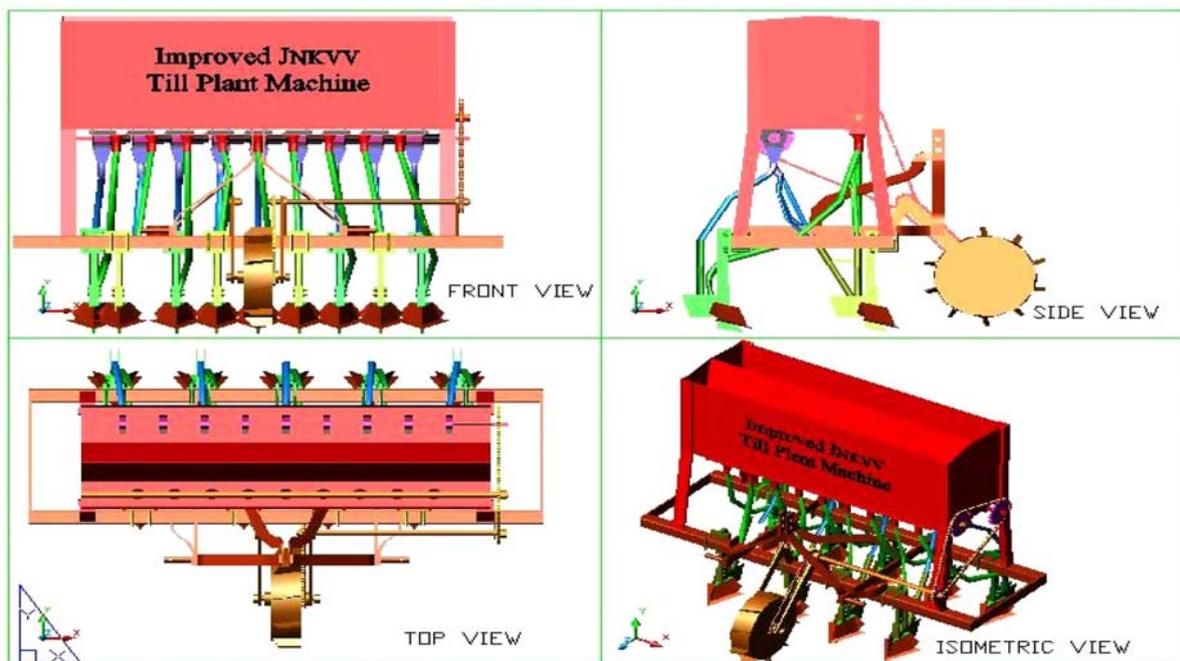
Isometric and orthographic view of the complete Improved Till Plant Machine
